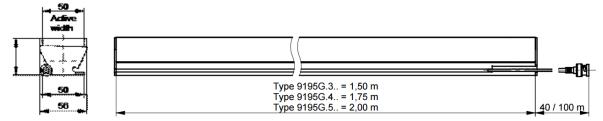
Dimensions of Lineas sensor (Type 9195...)
